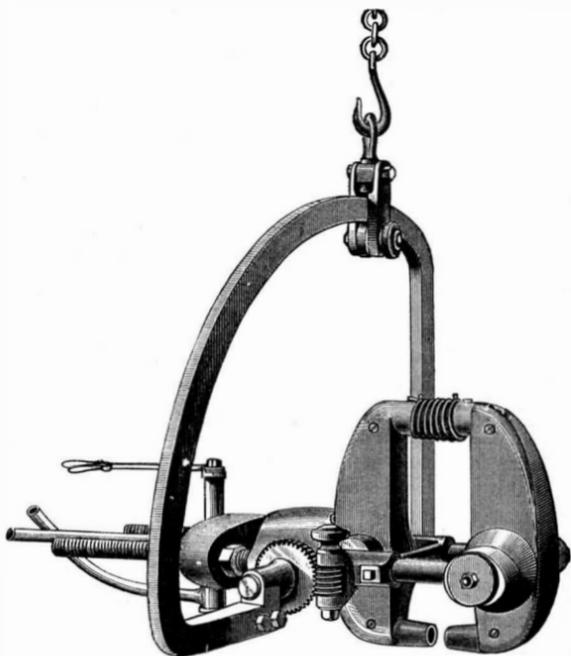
SUSPENDED RIVETING MACHINE—SIDE VIEW.
